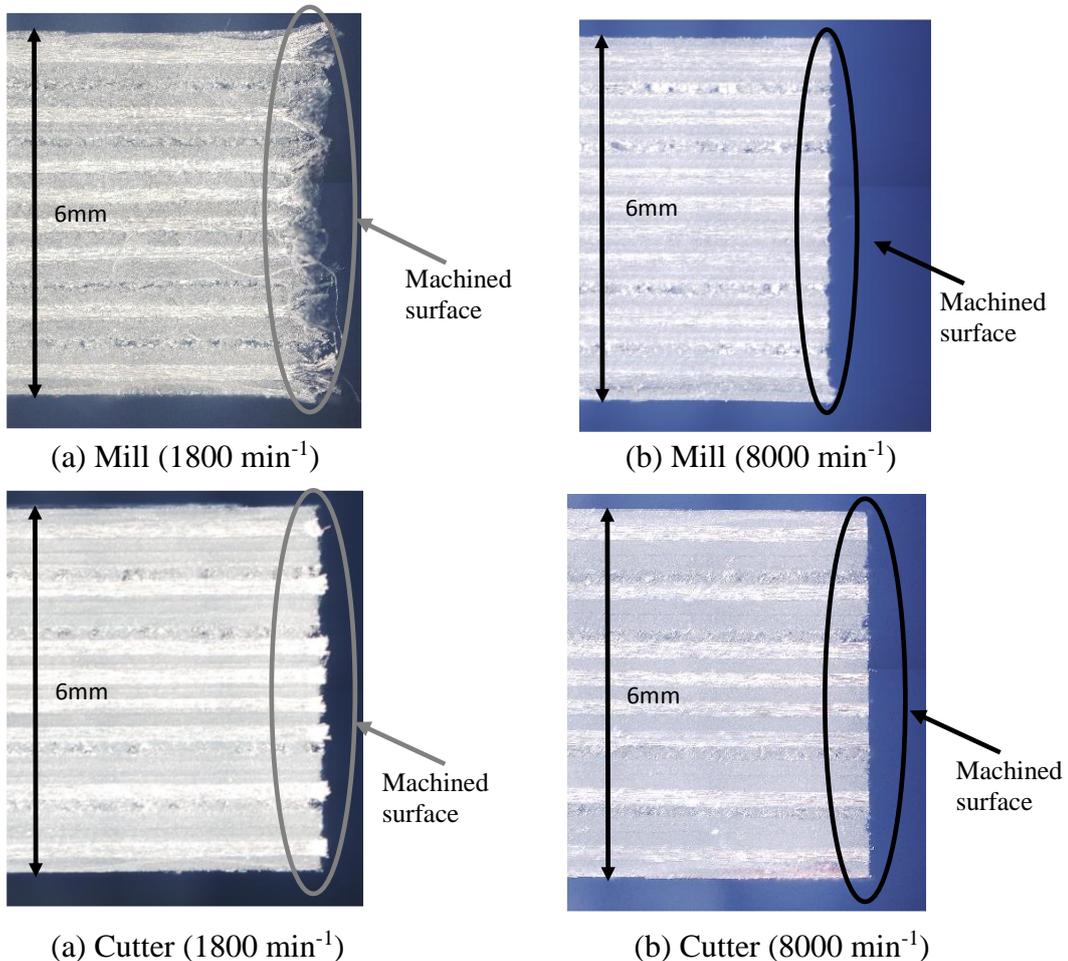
Photograph of machined surface ( $f=0.065\text{mm/rev}$ ,  $b=0.6\text{mm}$ )
